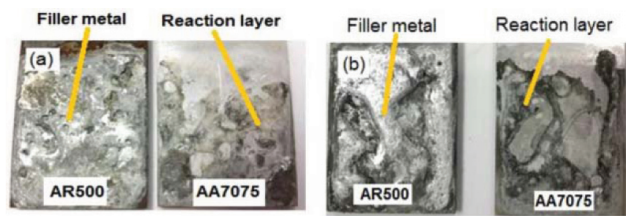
Fractured surfaces of AR500 steel and AA7075 brazed joint: (a) joint fracture surface for medium fine surface (grit 180), (b) joint fracture surface for coarse surface (grit 40)
